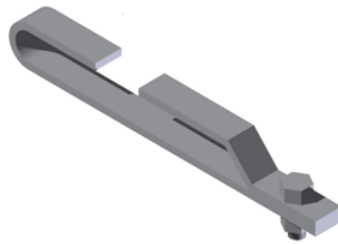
ADJUSTABLE SIDE BEAM CLAMP
